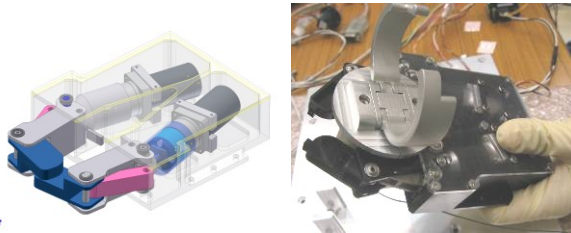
The CAD model and the Engineering Model of *REXJ Hand
